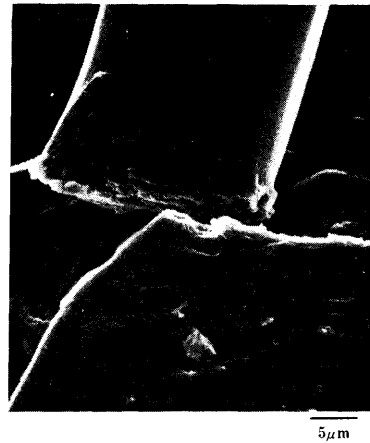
Bonding wire destruction by ultrasonic fatigue
